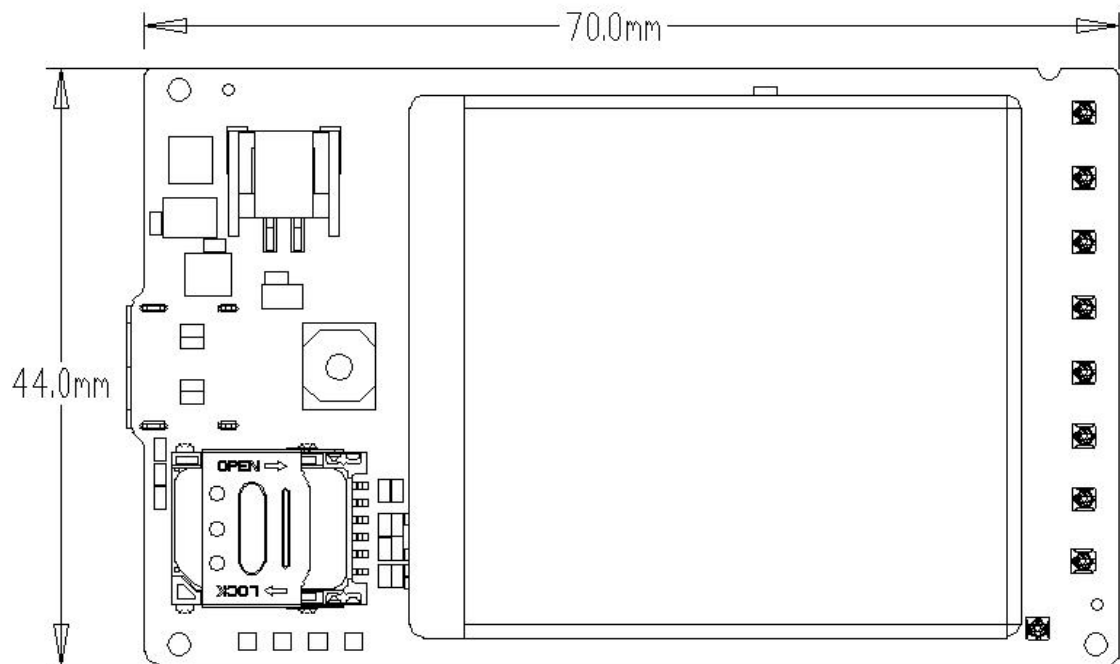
5G S-Module All-in-one Type-L PCB Size
